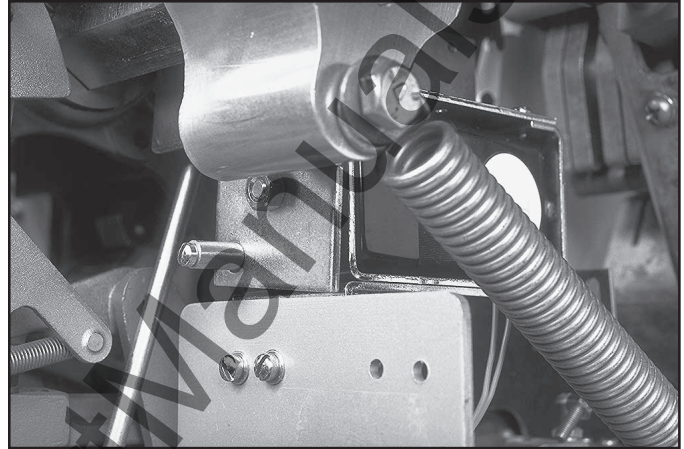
DTA Assembly Mounted to the Auxiliary Switch Plate
